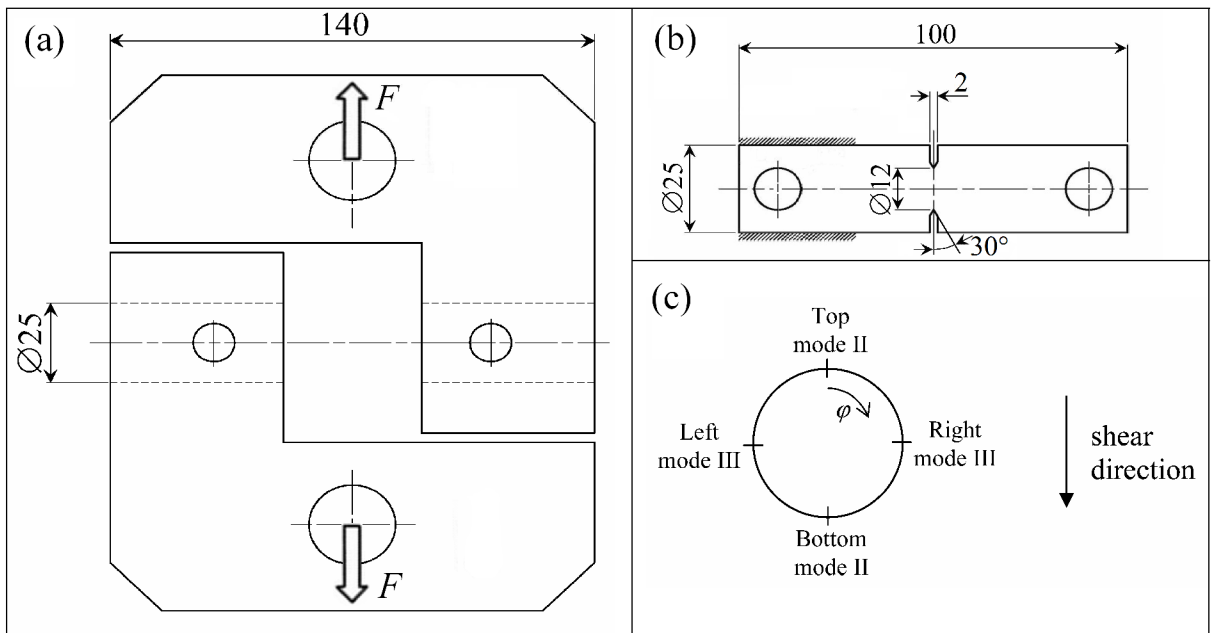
Scheme of the experiment with cylindrical specimens loaded in pure shear: (a) loading device; (b) pure shear specimen; (c) specimen cross section with the corresponding loading modes.
